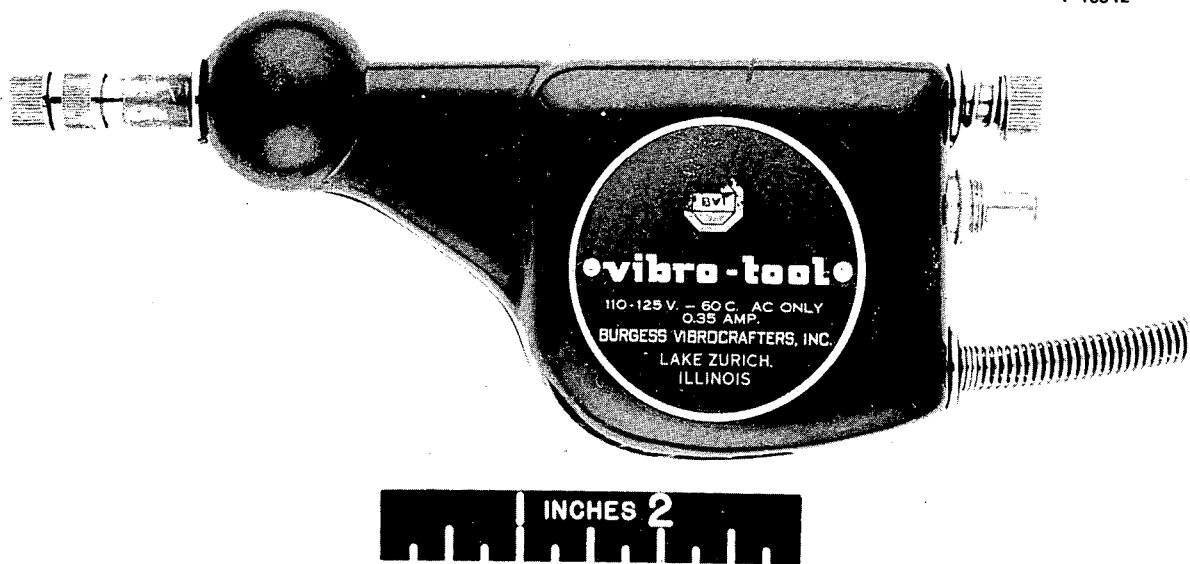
Vibrating Tool for Removing Rings From Molds.
